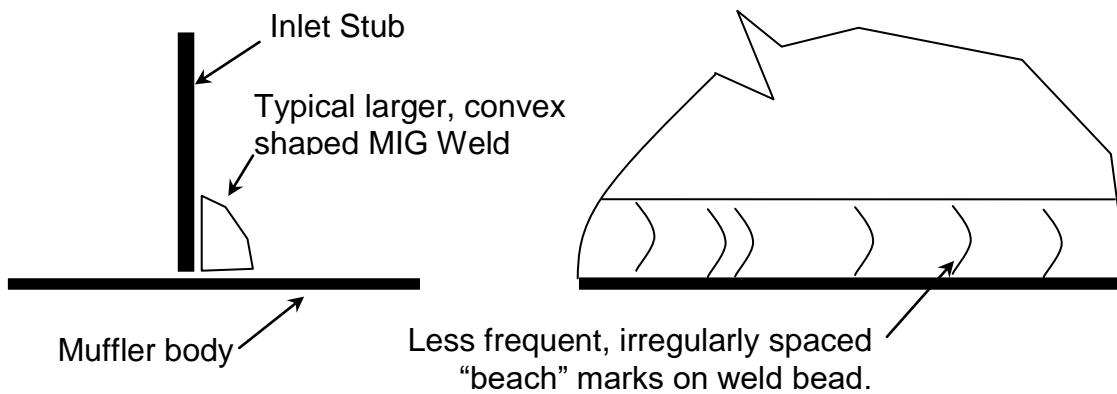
Example MIG-Welded Inlet Stub
